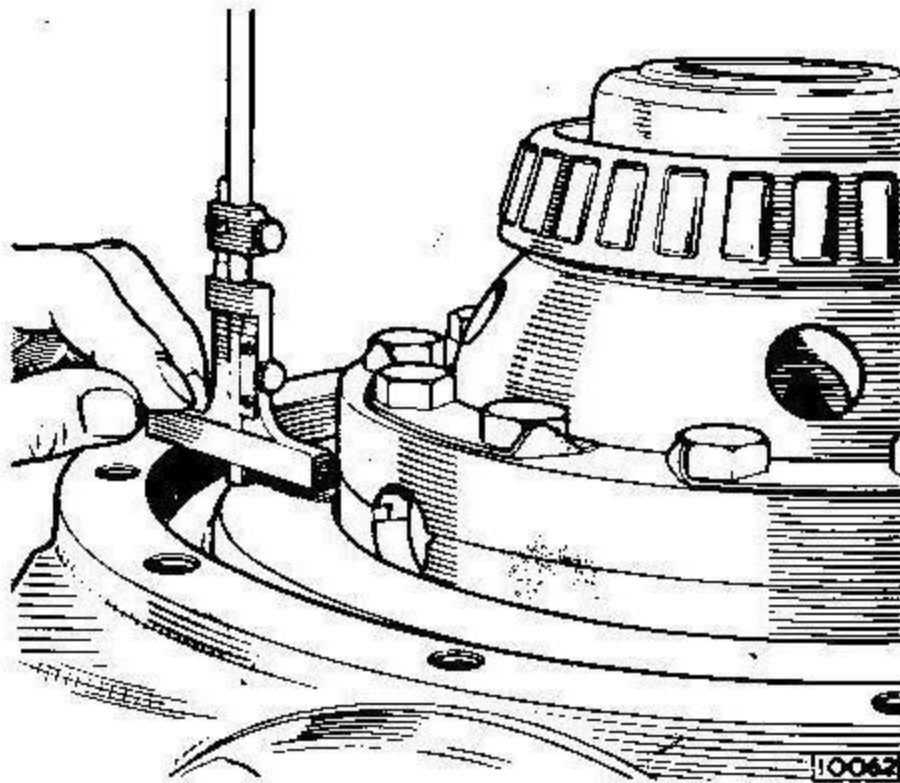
Checking the dimension from the back face of the crown wheel to the centre case mounting face
